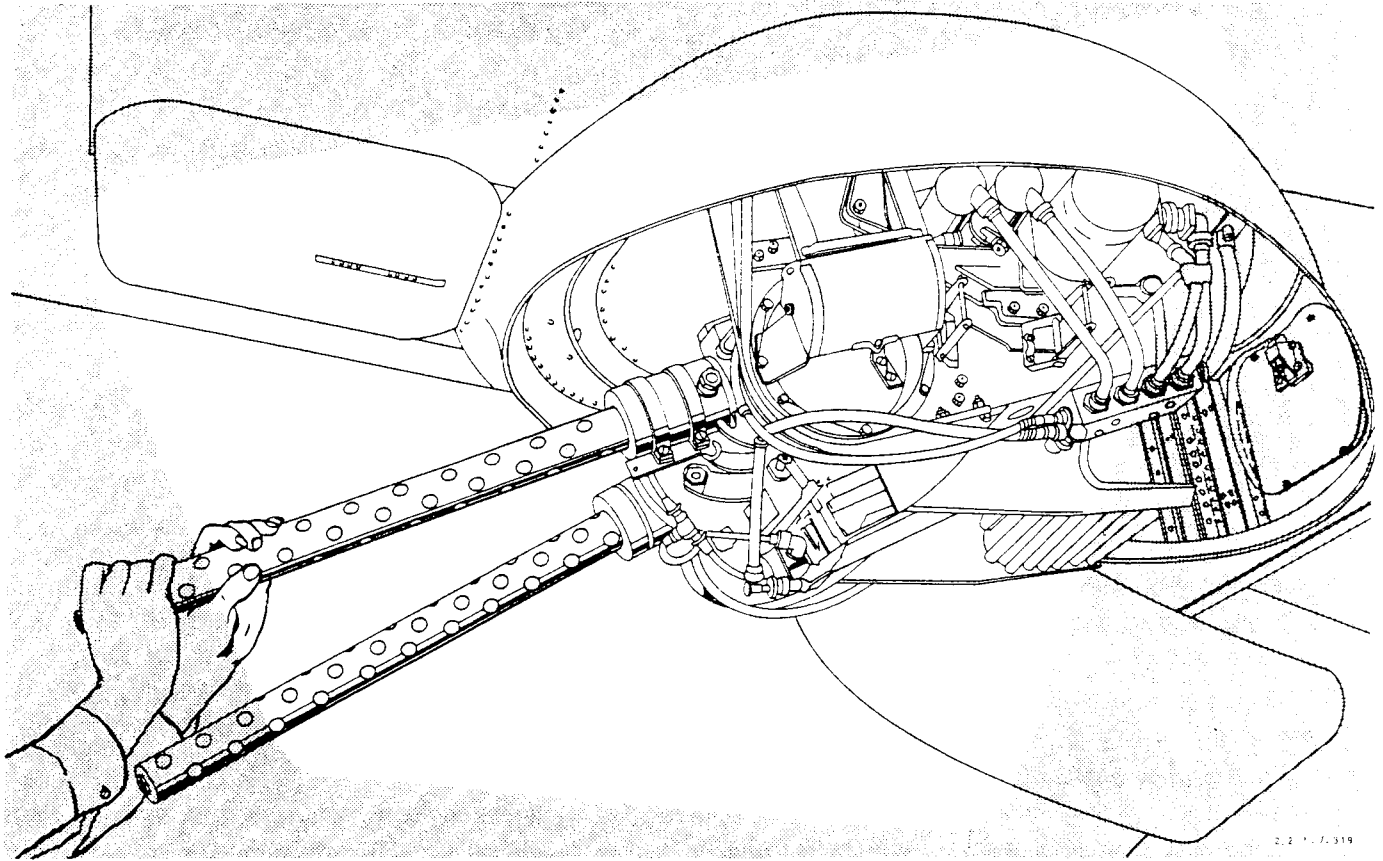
Lower Turret Guns Installation and Removal (View 2 of 3)
